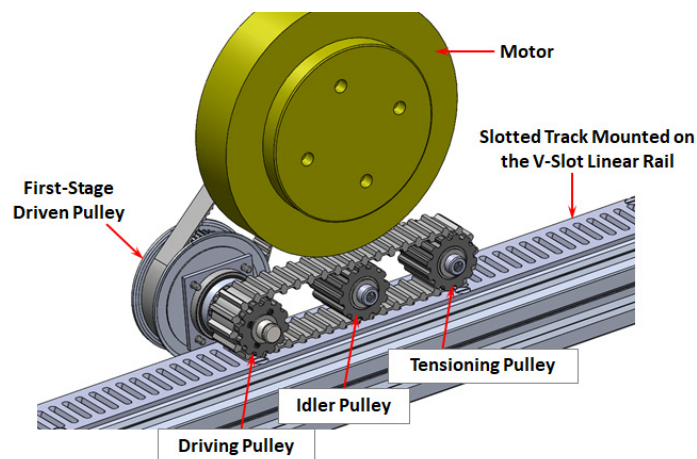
Design details of the B-SALD driving components (bottom view of the prototype).
